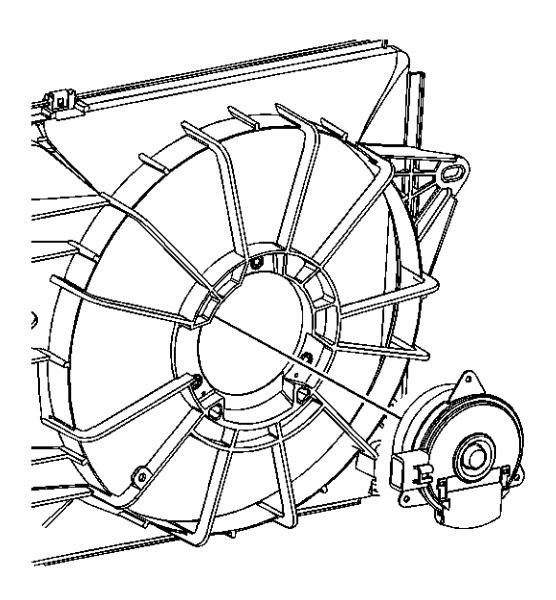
Removing/Installing Cooling Fan Motor Courtesy of GENERAL MOTORS CORP.
